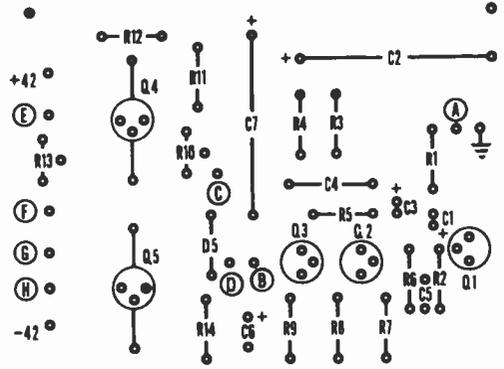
Component layout on printed circuit board. To orient this view with the printed circuit board on the opposite page, just imagine the copper foil side of the board flipped over from right to left.
